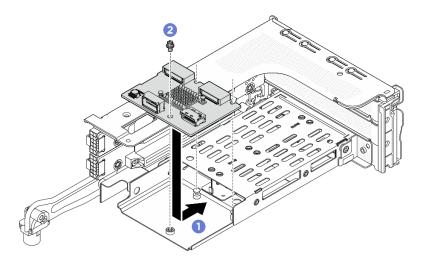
Installing the M.2 backplane to 3FH M.2 riser cage
